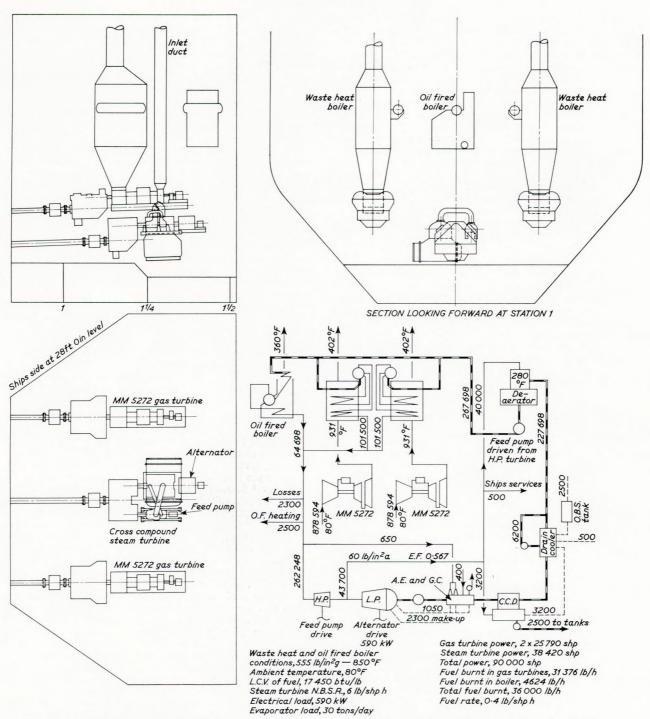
Arrangement of machinery and heat balance for 90 000 shp combined steam and gas turbine cycle
